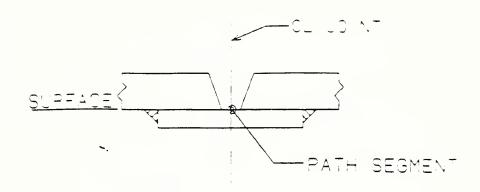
Example of a Joint between two Plates Parts with Edge Preparation and a Welding Process using a Backing Strip
